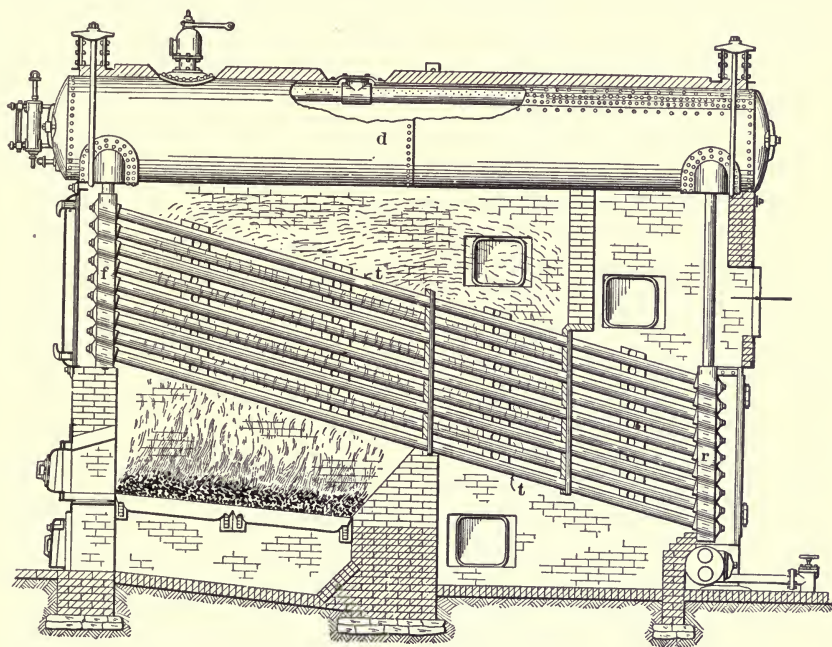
Longitudinal section of a horizontal water tube boiler.
